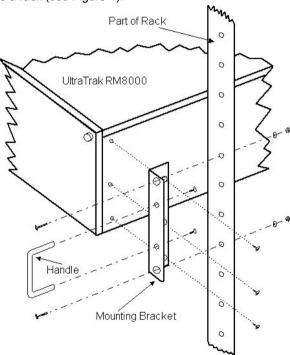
Mounting Bracket Assembly (only one of two sides shown)
